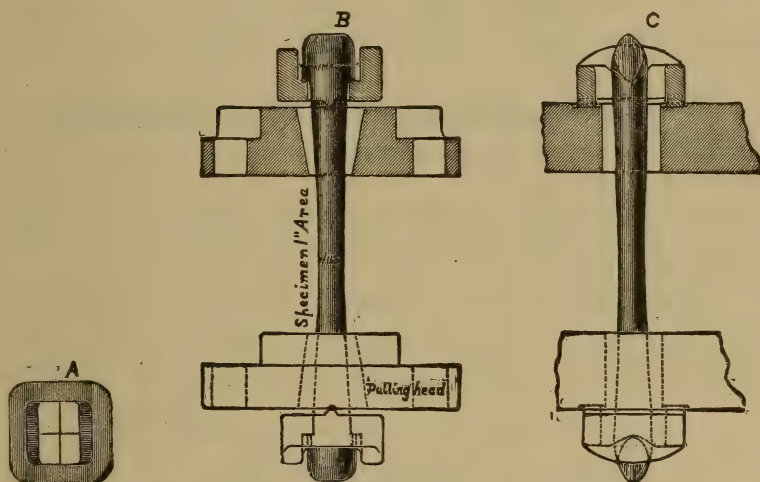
PROPOSED FORM FOR CAST-IRON SPECIMENS.
